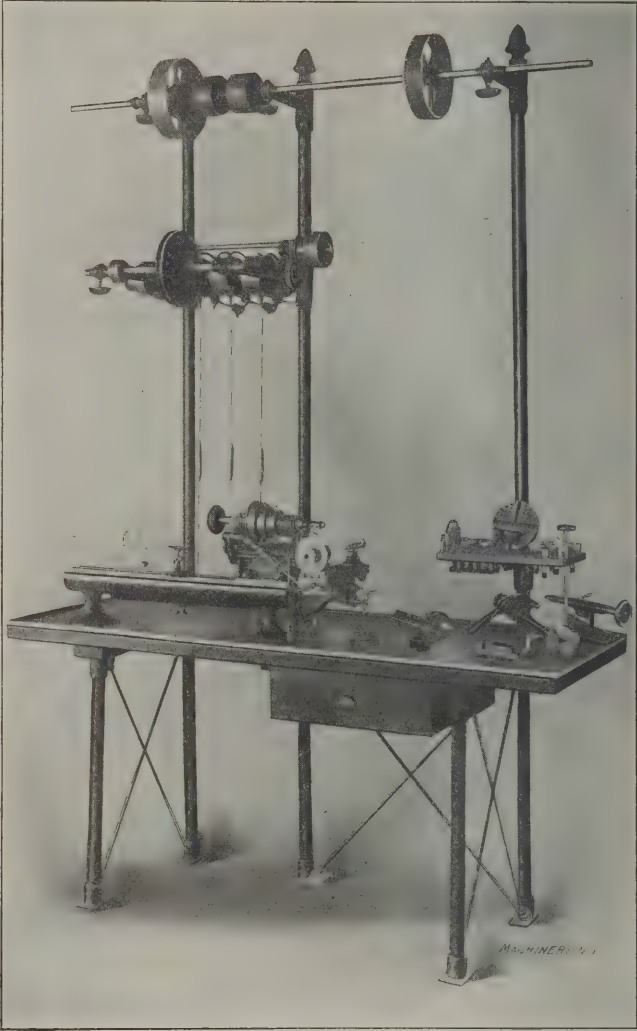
Hardinge Bros. Bench Lathe Milling Attachment.
